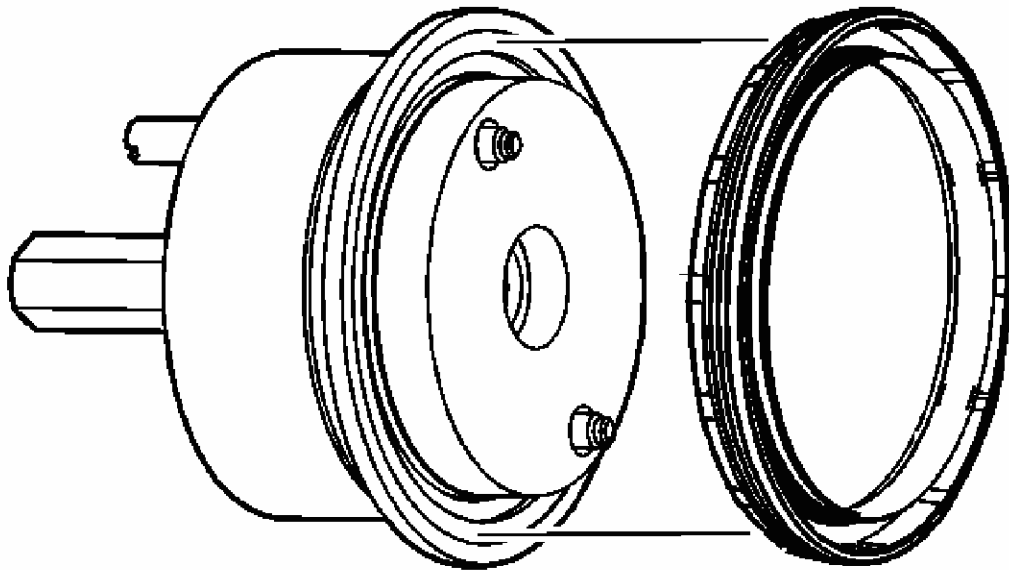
Positioning Rear Seal Onto J 45930-A Crankshaft Rear Oil Seal Installer
